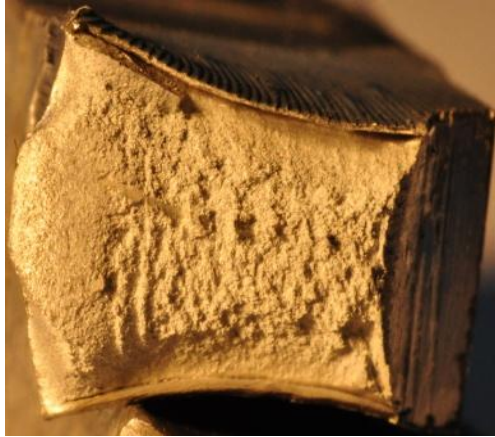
₁. Macrophoto. fracture (600rpm,125mm/min)
